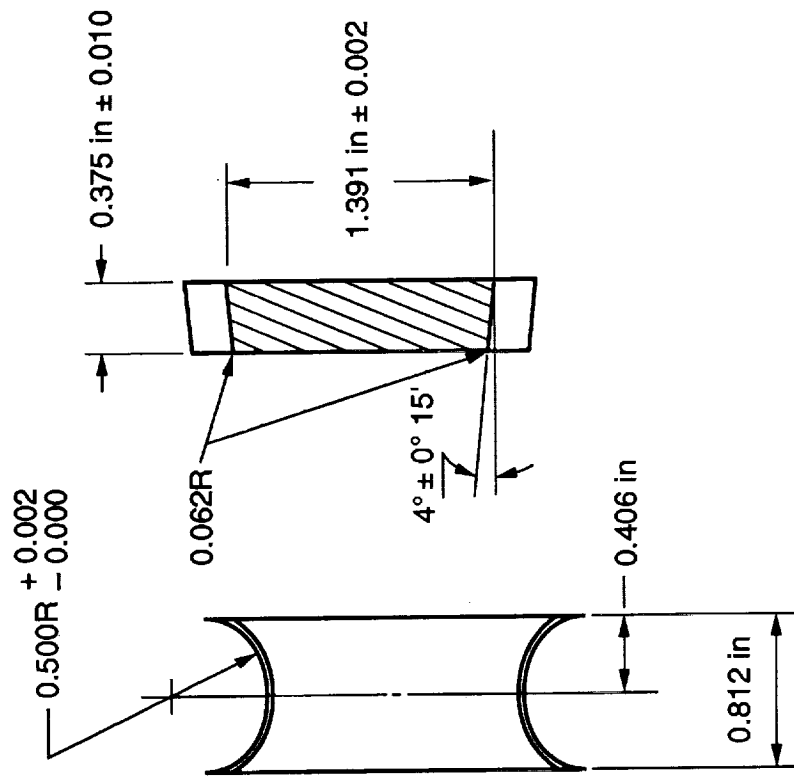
B. Stress Corrosion Frame Crosshead (English Units).
